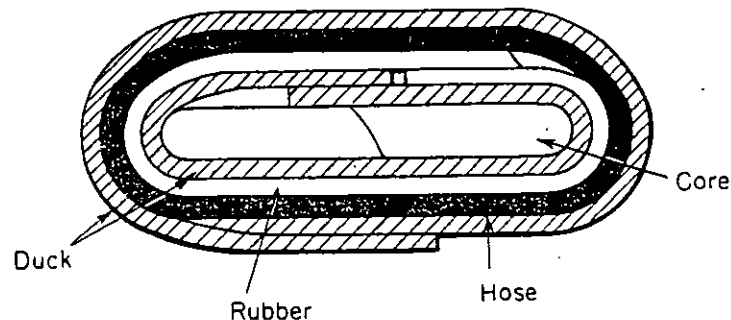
Arrangement of hose and steel core in splicing cotton-jacket, rubber-lined fire hose.
